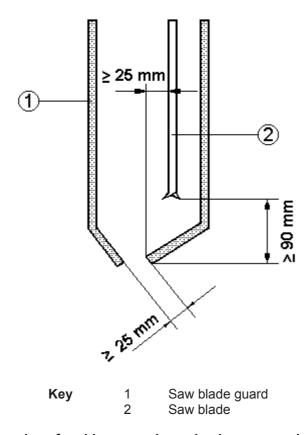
Dimensions for chip removal opening in saw guards below the table
